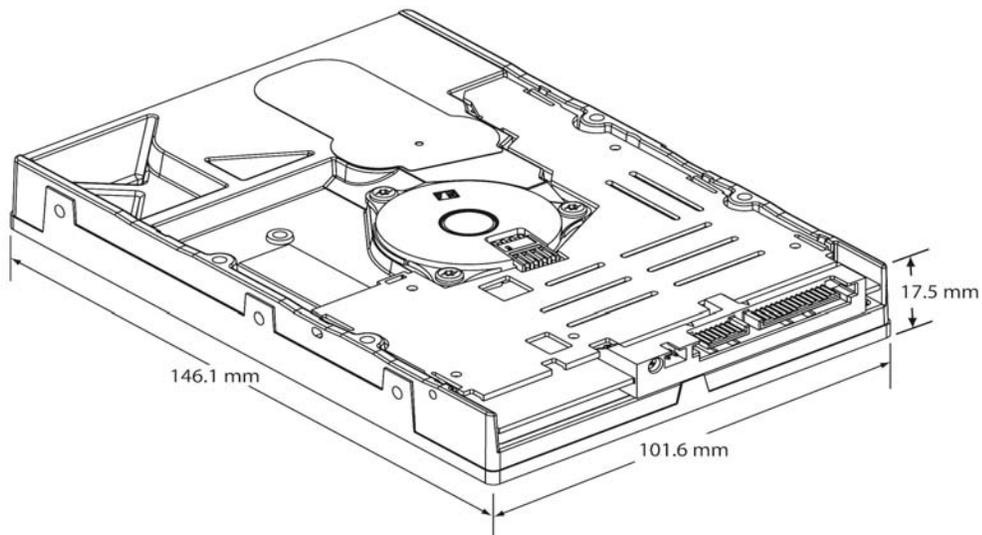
Mechanical Dimensions of Maxtor DiamondMax 8S 40GB SATA Hard Disk Drive
